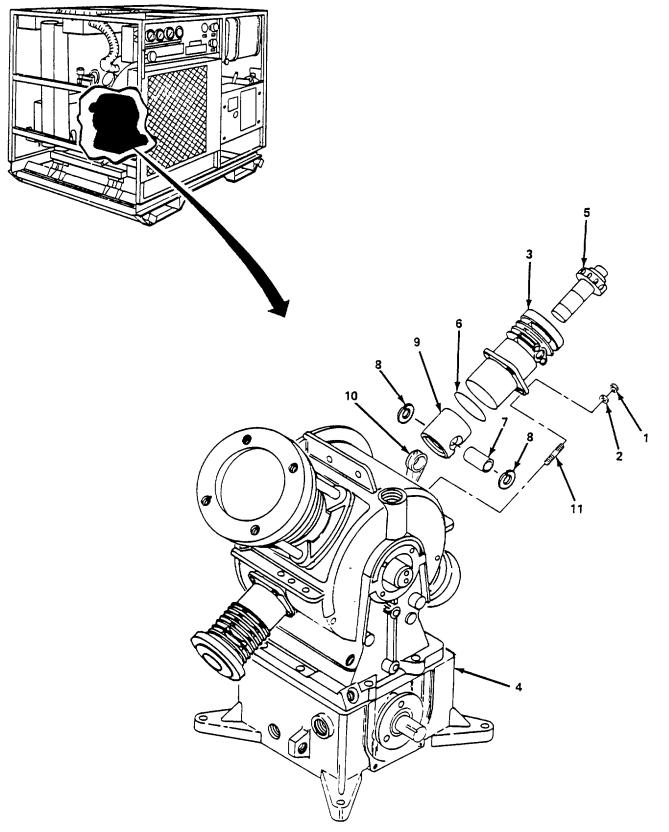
4th Stage Cylinder and Piston, Replace.
